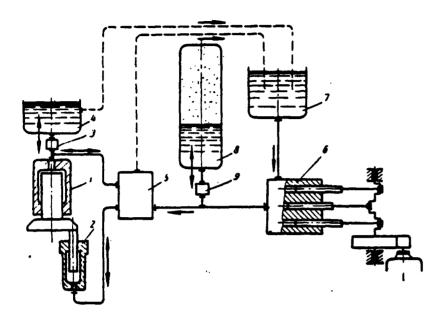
The schematic diagram of press with the pump-and-battery drive: 1 - working cylinder; 2 - cylinder of recurrent course; 3 - filler valve; 4 - filler tank; 5 - controls of press; 6 - pump; 7 - pumping tank; 8 - storage battery/accumulator of high-pressure liquid; 9 - check valve.
